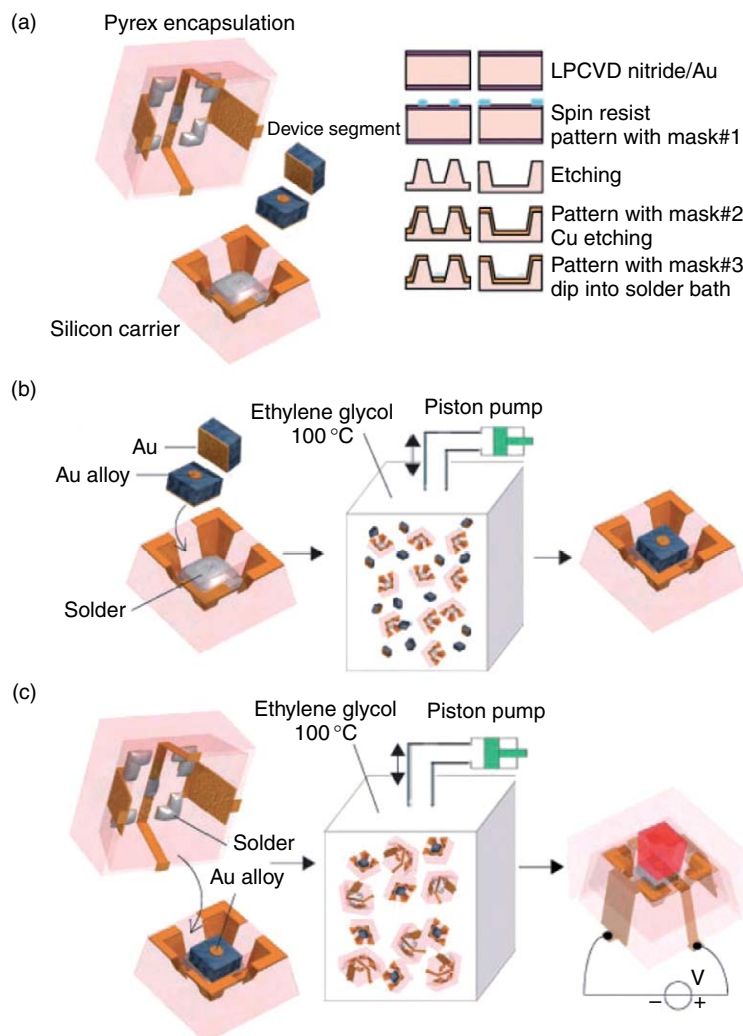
Schematic overview of the solder-directed 3D assembly of LED components. (a) Layouts of carrier, device, and encapsulation components fabricated by surface micromachining and etching. The illustrated device segment is a LED that has two contacts: a small circular anode on the front, and a large square cathode covering the back. The silicon carrier has a solder-coated area in a tapered opening to host a single semiconductor device segment. The encapsulation unit has five solder-coated copper areas inside a tapered opening to connect to corresponding contact pads on the device and the carrier. (b) Chip-on-carrier assembly and (c) chip encapsulation in an ethylene glycol solution at 100 °C, where the solder is melted. The components, agitated by using a piston pump, self-assemble and form a 3D circuit path between device layers that allows testing in a surface mount device configuration. (Photo courtesy: Zheng W, Buhlmann P, Jacobs H O 2004 Sequential shape-and-solder-directed self-assembly of functional microsystems. *Proc. Natl. Acad. Sci. USA* 101, 12814–17.)
